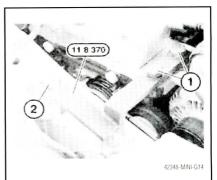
Mounting special holding tool on engine—Cooper Coupe
